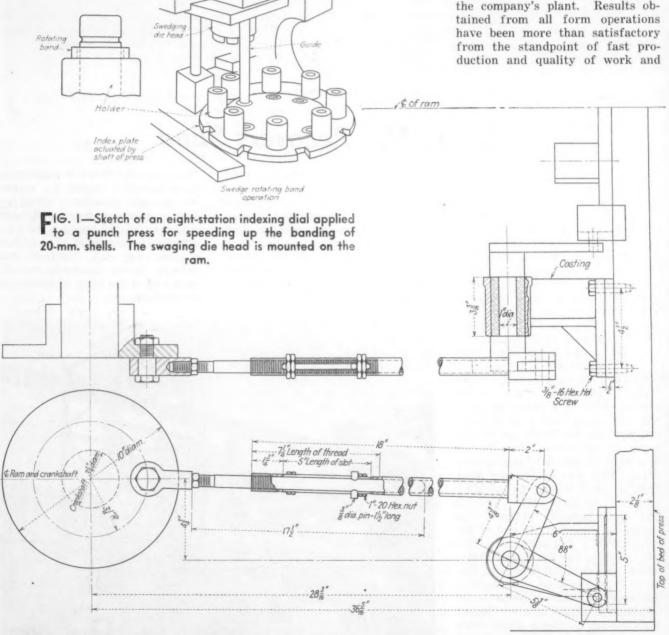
Details of the connecting rod and bell crank mechanism for indexing the punch press dial shown in Fig. 1. By using interlocking tubes, a limited amount of lost motion can be provided.
